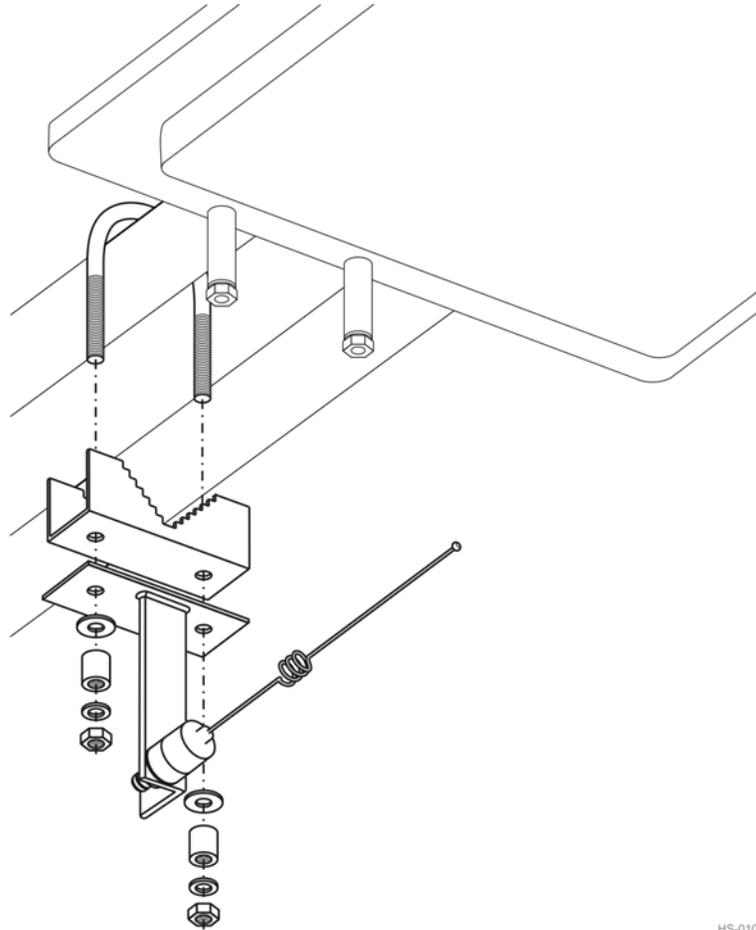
Check Tag Antenna Mounting on Mounting Pipe
